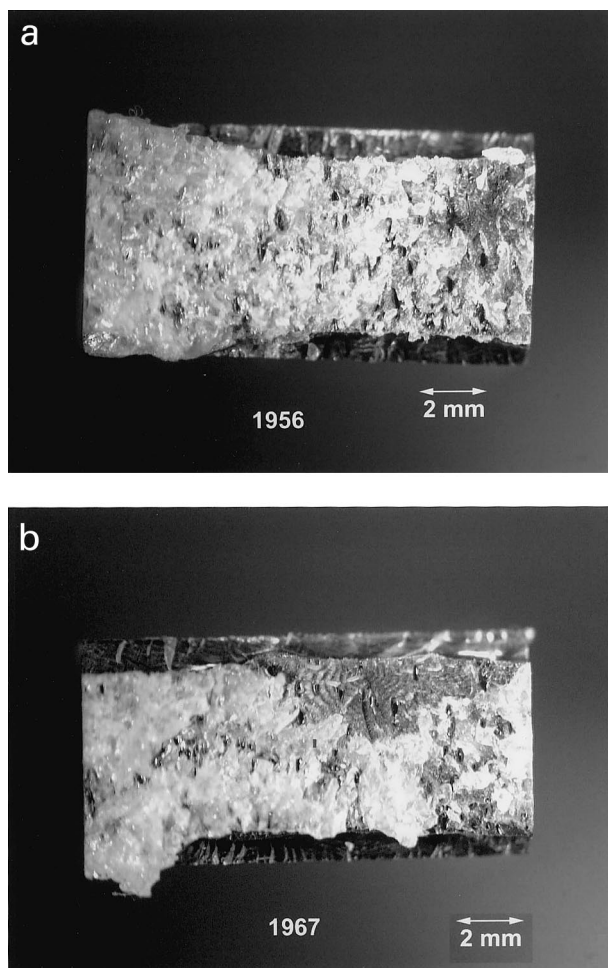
Fracture surfaces of 6.2-mm-thick PEI specimens for hot-tool welds made at (a)  $T_H = 380^\circ\text{C}$ , and (b)  $T_H = 395^\circ\text{C}$ . In these welds, the melt time was 20 s, the melt and weld penetrations were 0.13 and 0.66 mm, respectively, and the seal time was 10 s.
